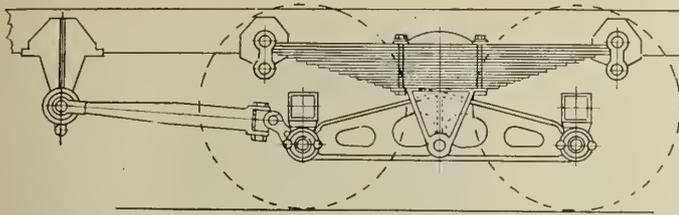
Typical American Rear Axle Mounting for Six Wheel Truck.
